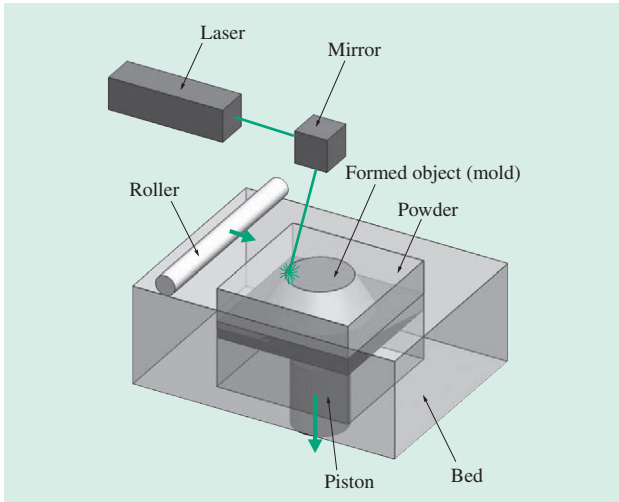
Processing with 3D Printer. Uniformly spread metallic powder is sintered into any shape with a laser. Repeated layering is used to enable mold fabrication with an internal structure.
